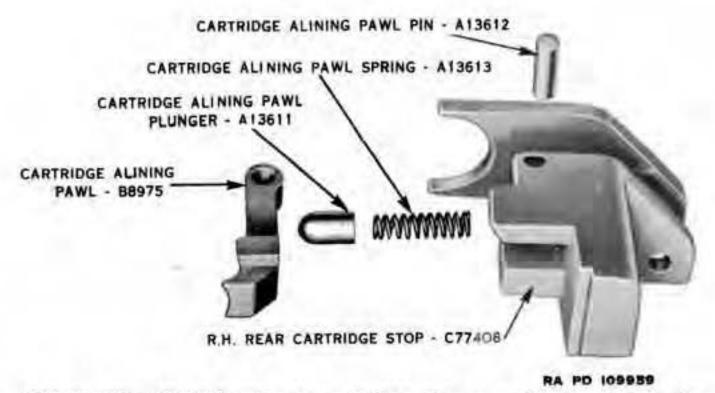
Right-hand rear cartridge stop assembly-exploded view.
